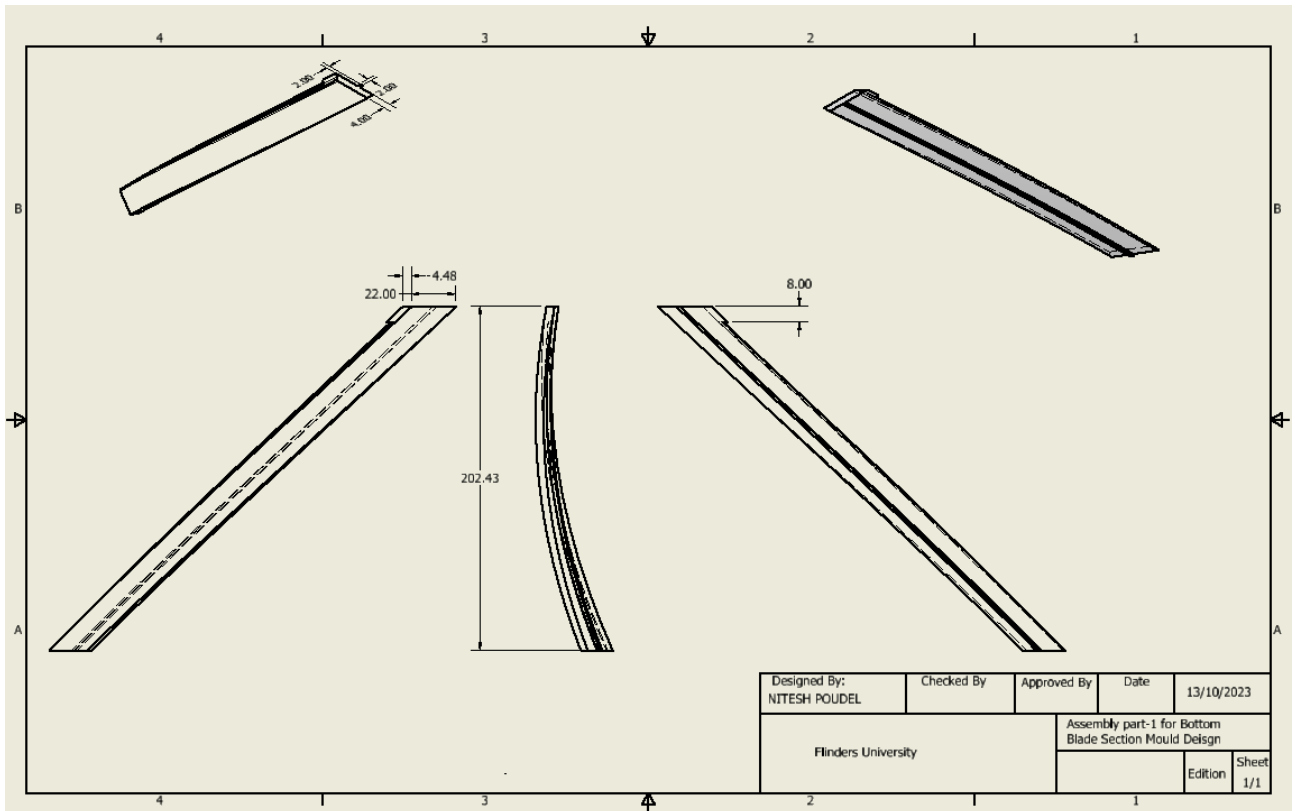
Assembly part-1 for Bottom Blade Section Mould Design
